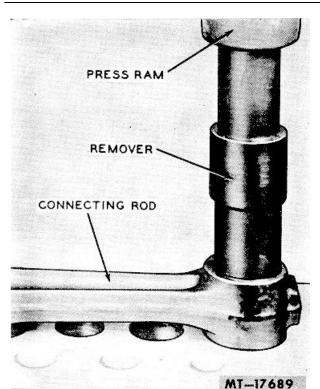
Using SE-1885 Remover and SE-1033 Support Plate to Remove Connecting Rod Bushing
